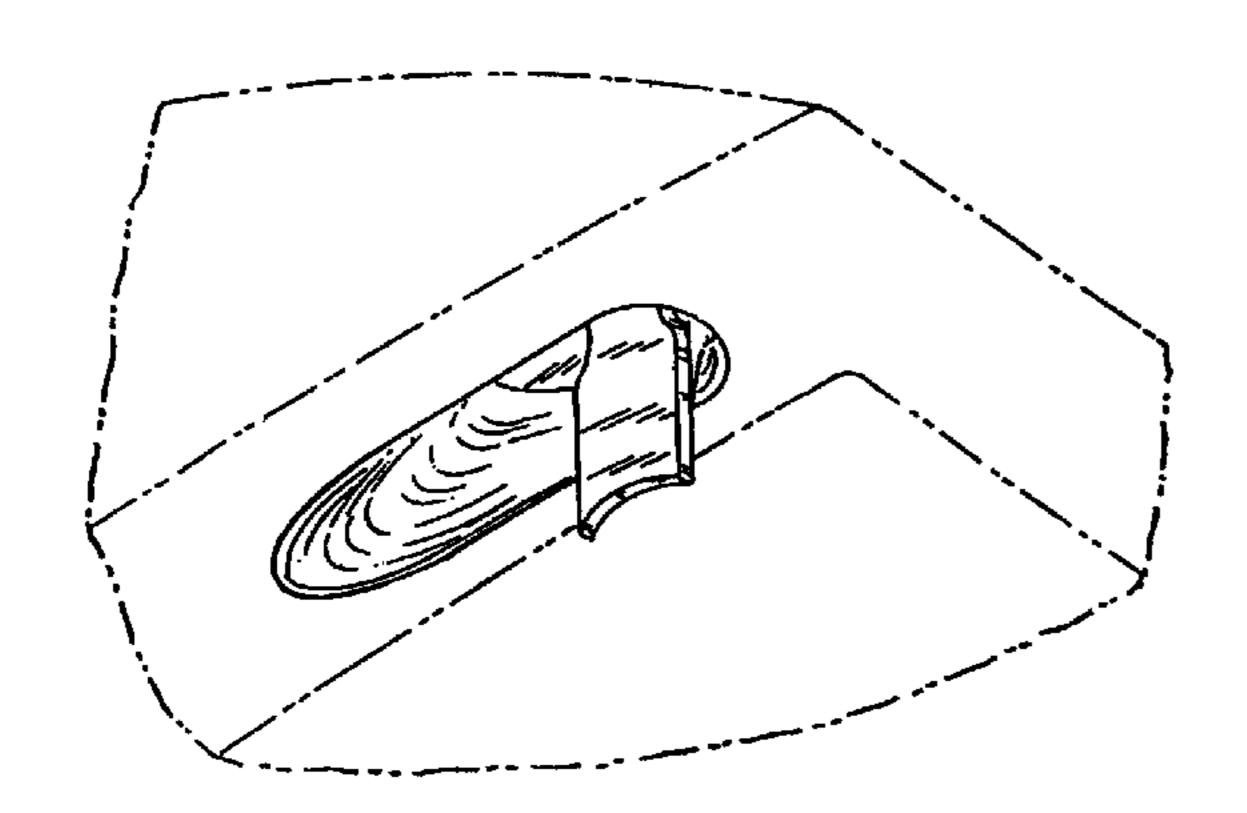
is top plan view of the latch handle and housing in FIG. 5.
